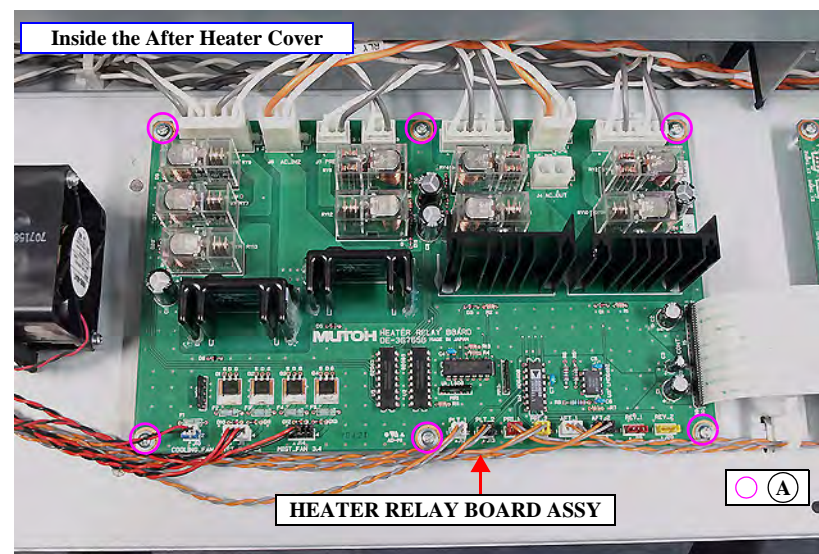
Removing the HEATER RELAY BOARD ASSY
